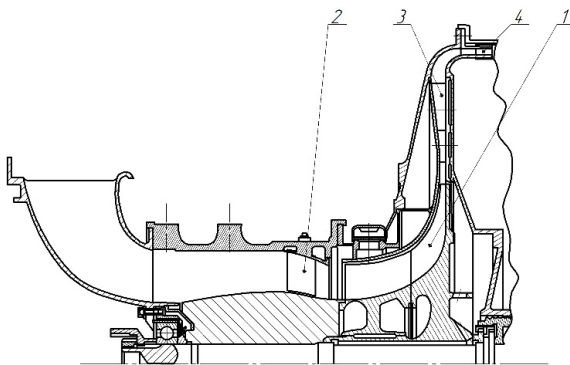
centrifugal compressor stage scheme: 1 is semi-open axial-radial impeller; 2 is blade of inlet guide vane; 3 is radial blade diffuser; 4 is axial blade diffuser.
